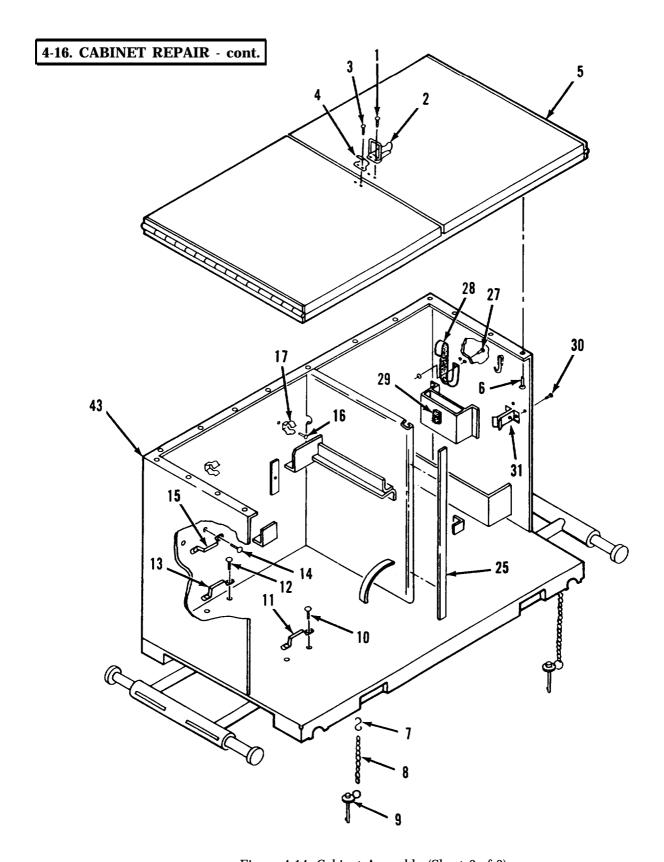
Cabinet Assembly (Sheet 2 of 2).
